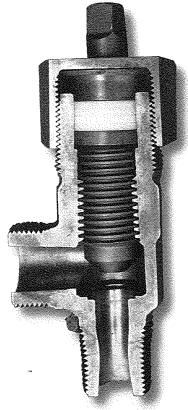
Cutaway View of 1-inch Cylinder Valve for 30B Cylinder [Reference 5]
